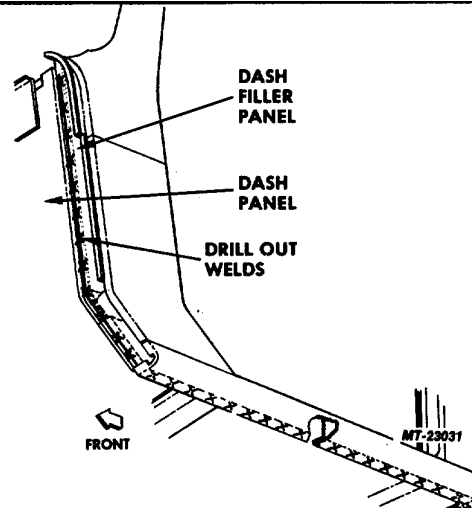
Filler Panel to Dash Panel Spot Welds
